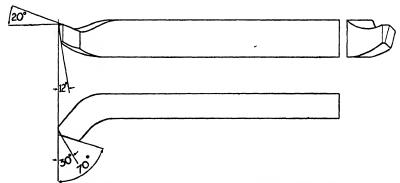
Heavy Cut Turning Tool for Magnesium Alloys (F. A. Hughes, Ltd.)
